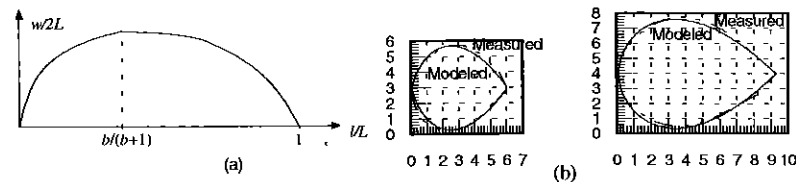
Symmetric modeling of the weld pool boundary. (a) geometrical explanation (b) modeling examples.
